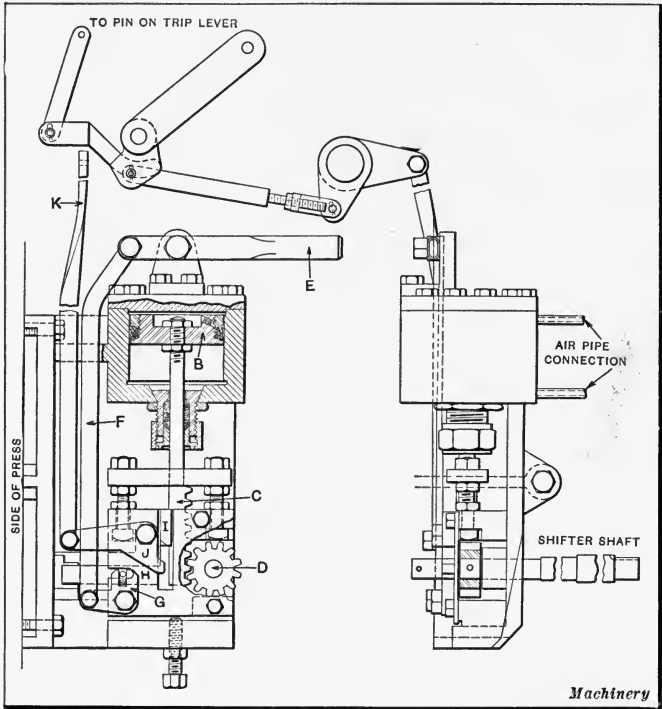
Mechanism of Compressed-air Control for Spindle Reverse, shown in Place on Machine in Fig. 5
